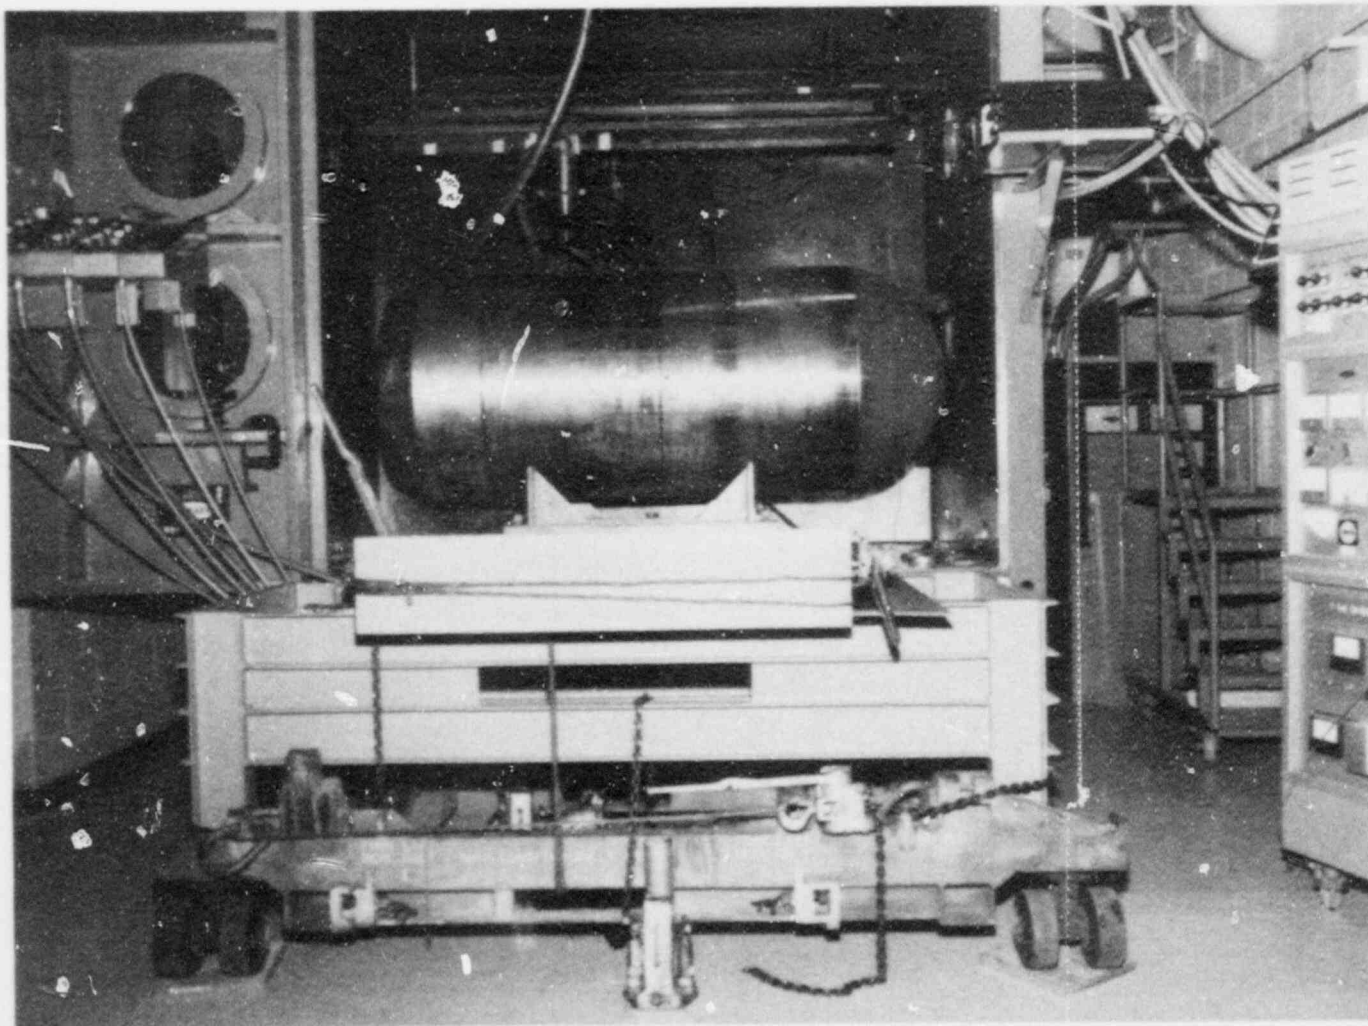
PTSE-1 test vessel in chamber of electron-beam welder.
